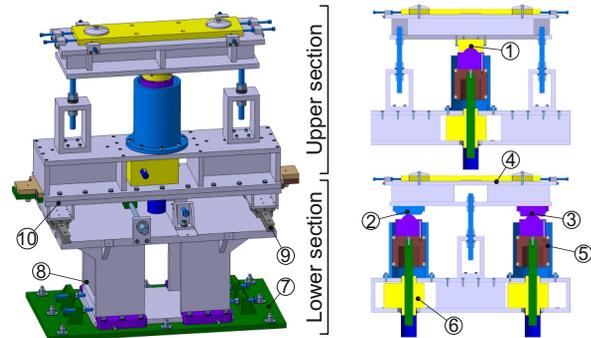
Isometric view of the single joint column (on left), section view of the upper section of single (top-right) and double (bottom-right) joint column. The numbers identify: 1) sphere joint, 2) ball-plane joint, 3) ball-groove joint, 4) plate-plate interface, 5) cylindrical guide, 6) screw jack, 7) floor plate, 8) H-beam, 9) linear guide, 10) interface block.
